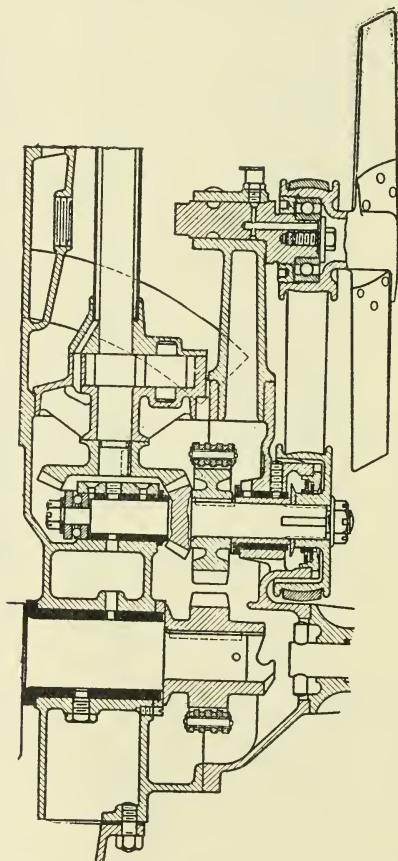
OVERHEAD CAMSHAFT DRIVE ON THE WOLSELEY ENGINE
